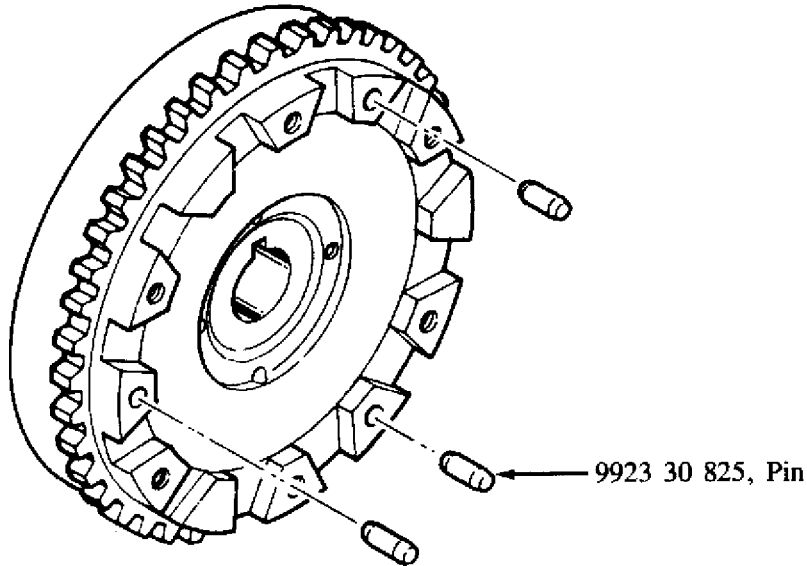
83-86 RX7 Flywheel and Alignment Pins
